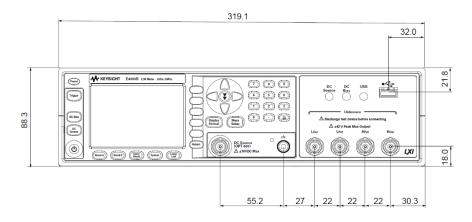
Dimensions (front view, without handle and bumper, in millimeters, nominal)
